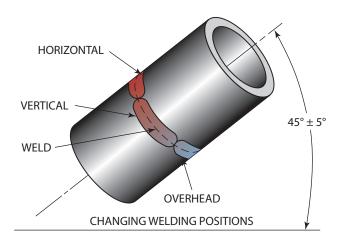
In the 6G position, the pipe is fixed at a 45° angle to the work surface. The effective welding angle changes as the weld progresses around the pipe.
